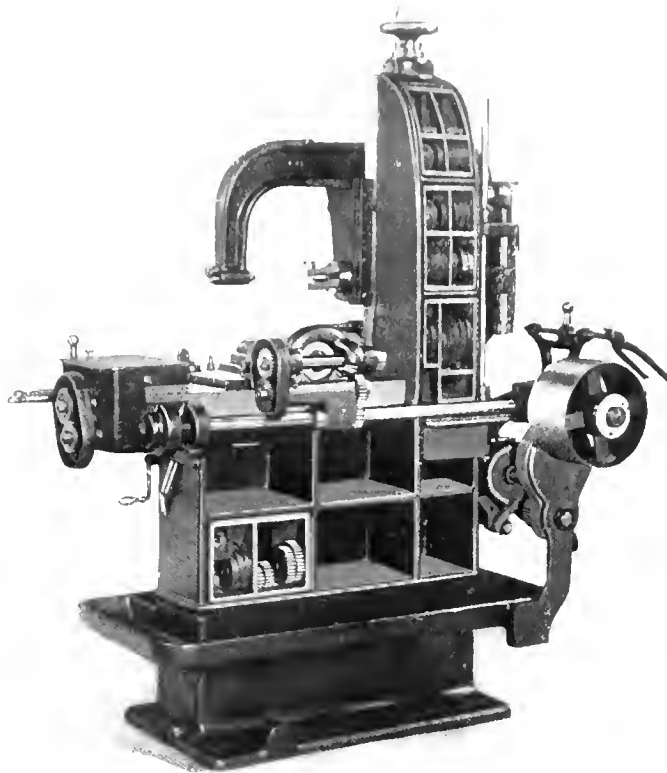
Rear View of Machine, showing Spindle Drive, etc.
